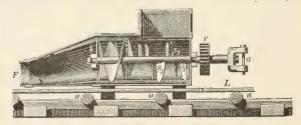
Seydl's mixing and forming machine for fibrous paste.
